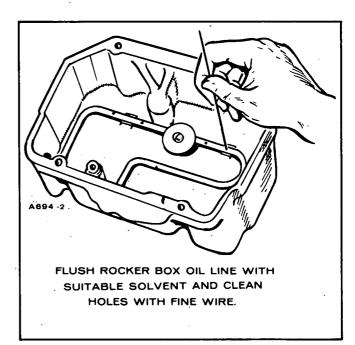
CLEANING ROCKER BOX OIL LINE
